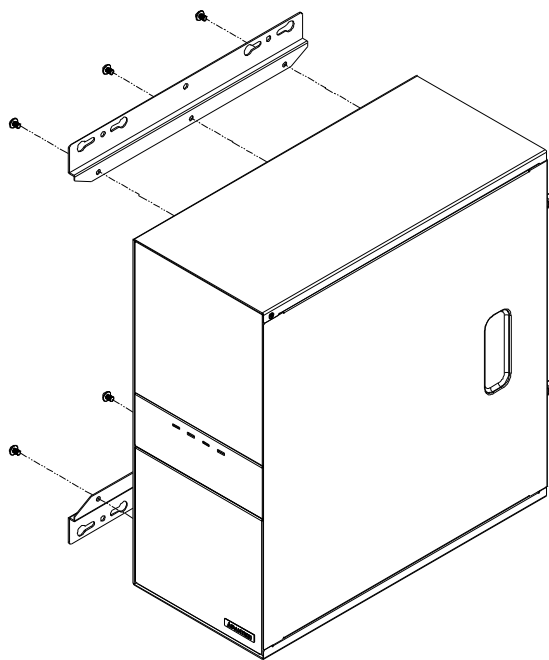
Installing the Wall-mount Brackets/ 安装壁挂式支架 / 安装壁挂式支架
